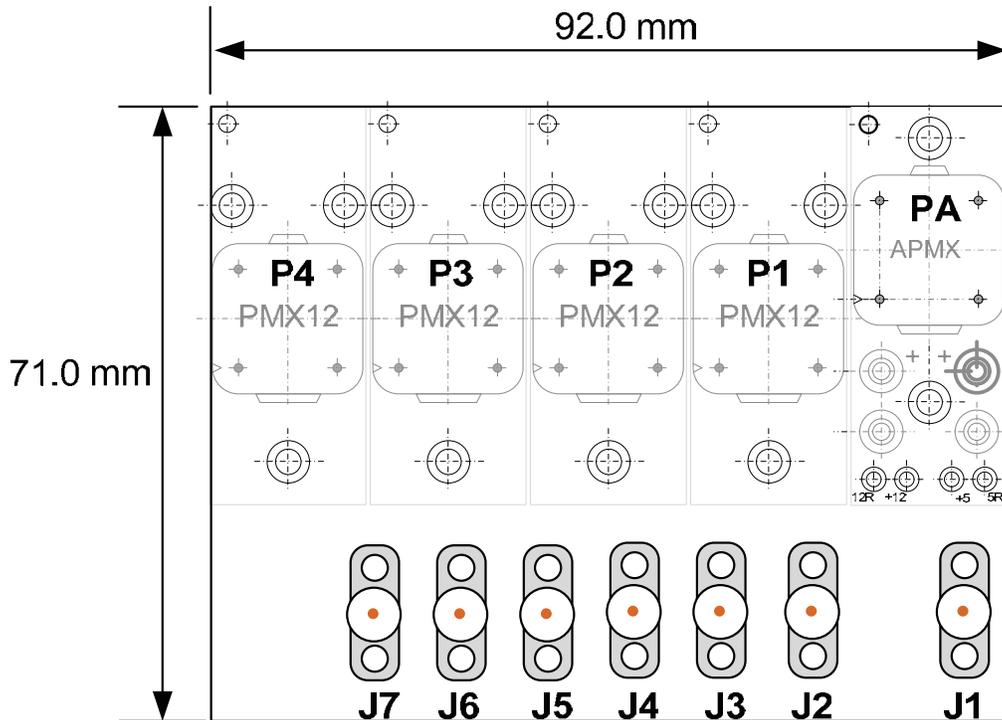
MEX4-IOB PCB Front Side layout looking through to the Rear Side. Meg-Array, pins, and surface-mount Tyco pressure-contact coaxial connectors are mounted on the Rear Side. SMA test jack connectors (J1-J7) are mounted on the Front Side.
